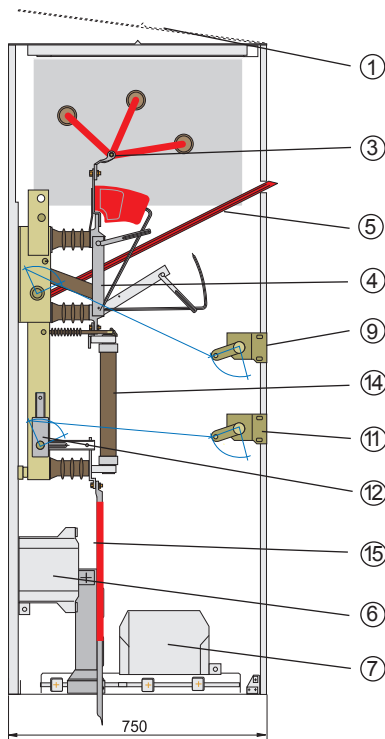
12 kV Transformer feeder panel with switch-disconnector H22 SEA, also possible with current and voltage transformer
